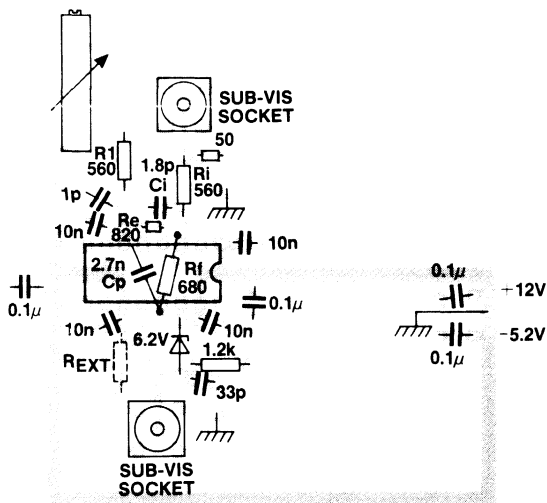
PCB layout for SL9999 demonstration board (Fig.12) viewed from component side and underside
